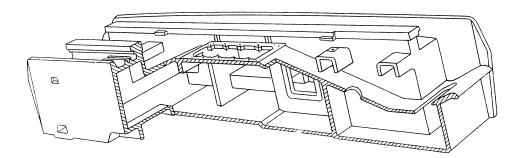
Base of a milling machine manufactured by the Kearney and Trecker Corp. (USA)
